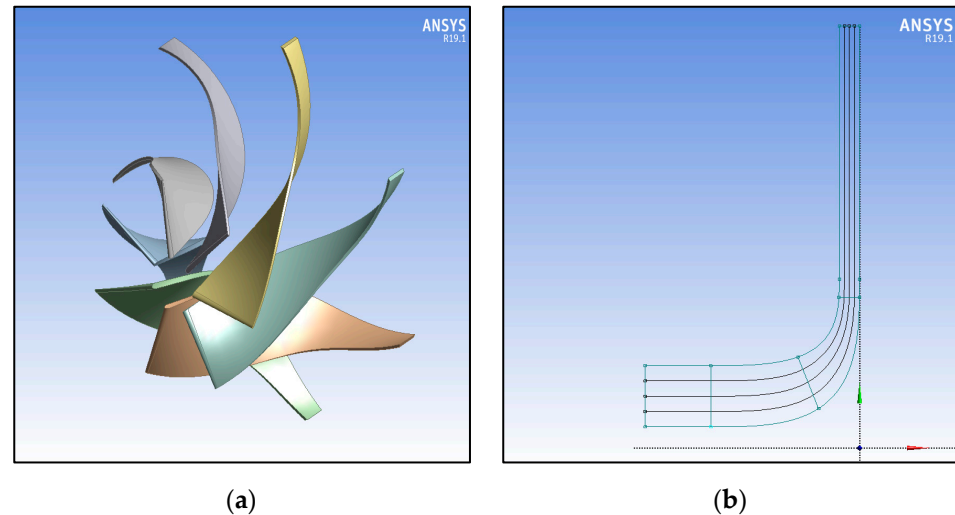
Impeller Blade Design (a) and Meridional Plane View (b).
